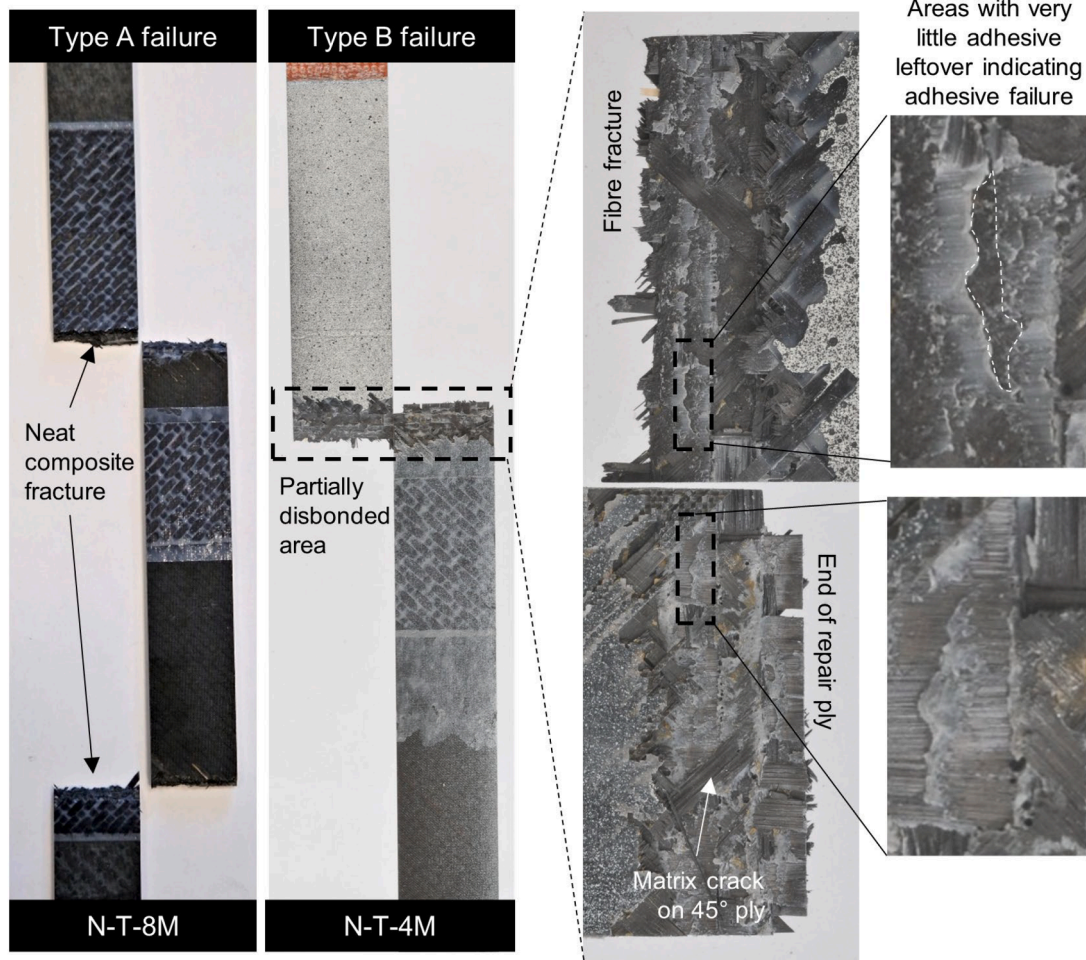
Macroscopic view of the fracture morphology of stepped repaired coupons.
